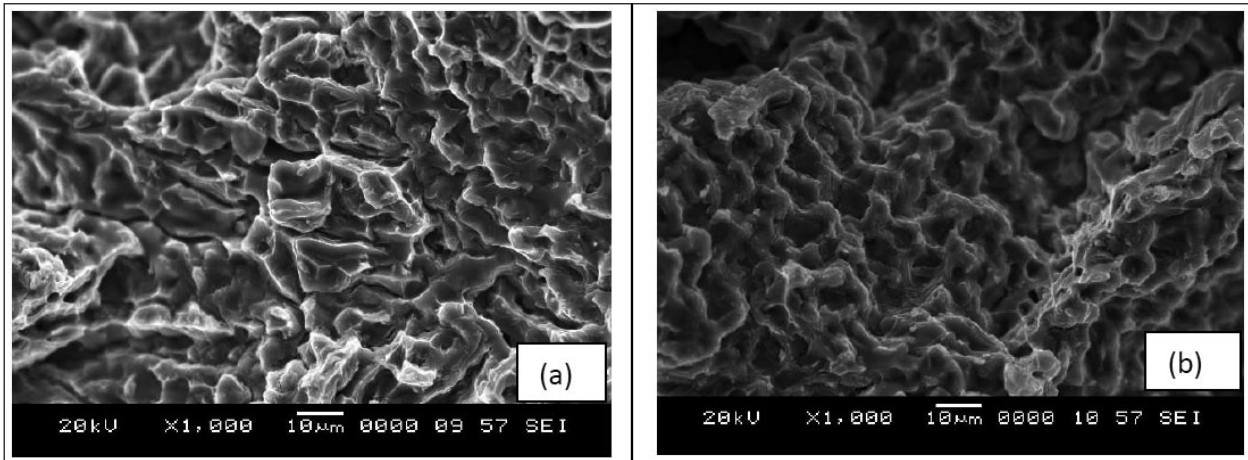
SEM Fractography of tensile specimens welded at optimized process parameters.
